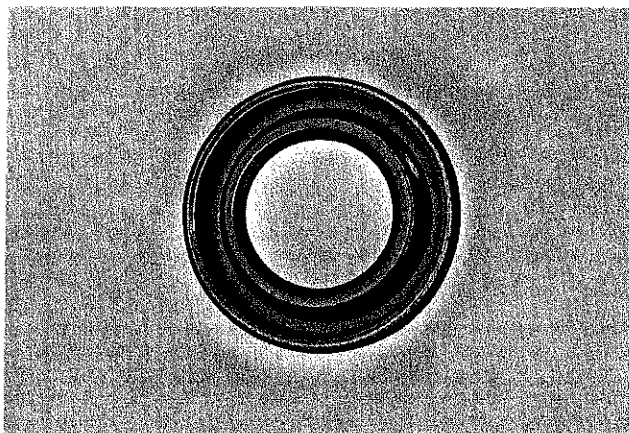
It is important that the lips of the oil seal be entirely free of nicks or cuts. Any damage to this sealing edge will permit oil leaks from the crankcase.
